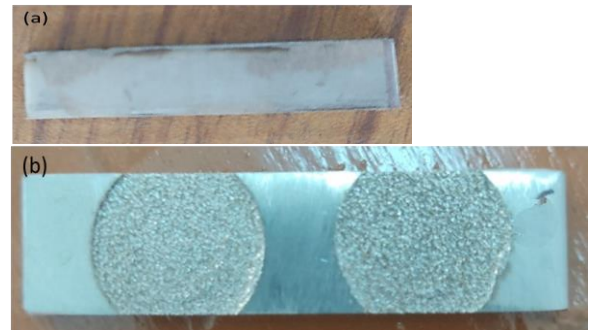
(A) Workpiece SS 316L plate and (B) EDM machined workpiece
